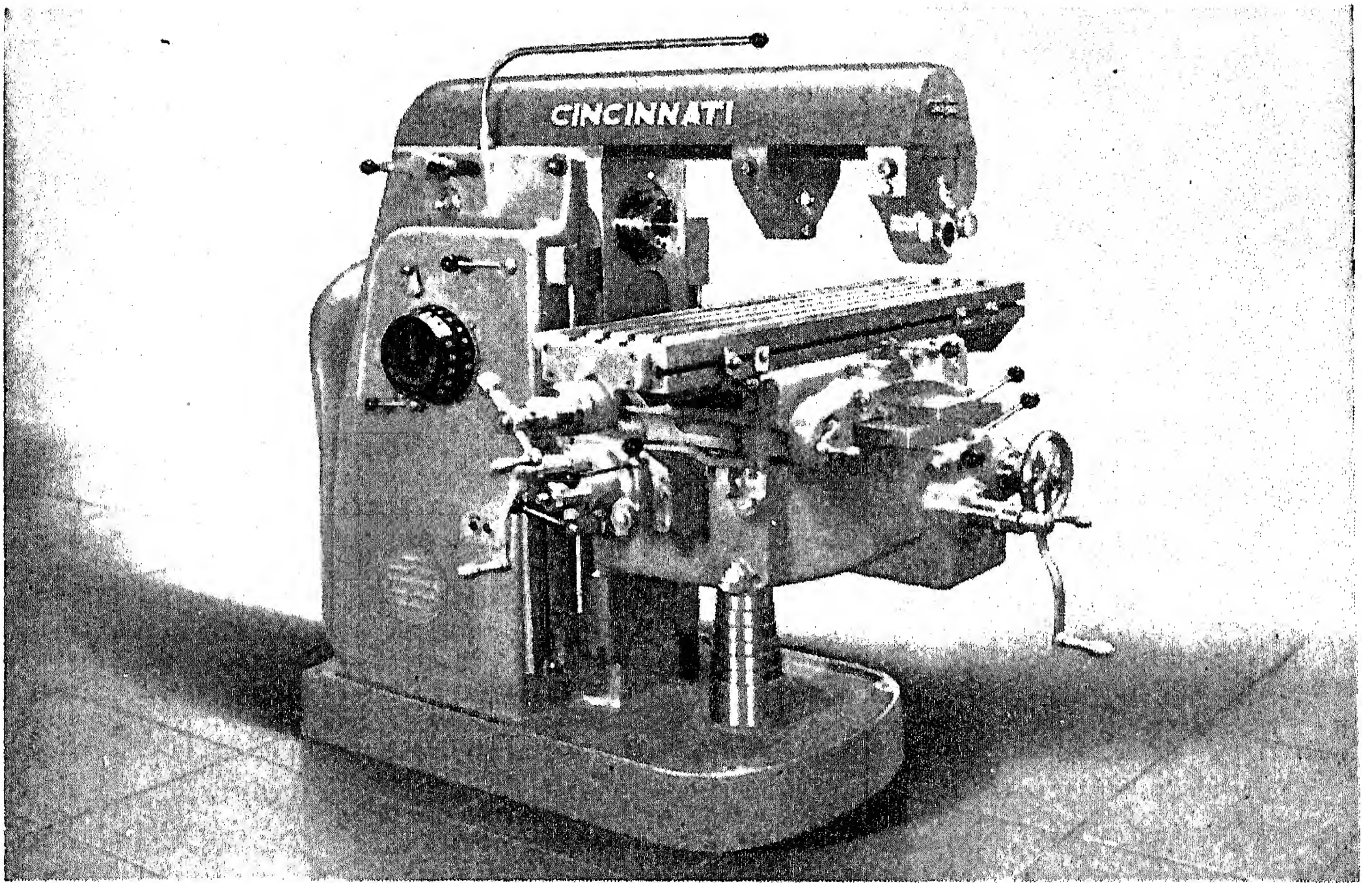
A No. 2 plain high speed horizontal knee and column type milling machine. (Courtesy Cincinnati Milling Machine Co.)
